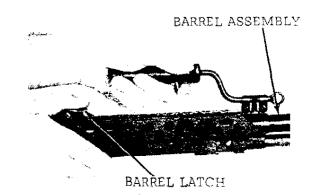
PIVOT PIN SCREW AND NUT FIGURE 18. REMOVING THE BARREL ASSY.
